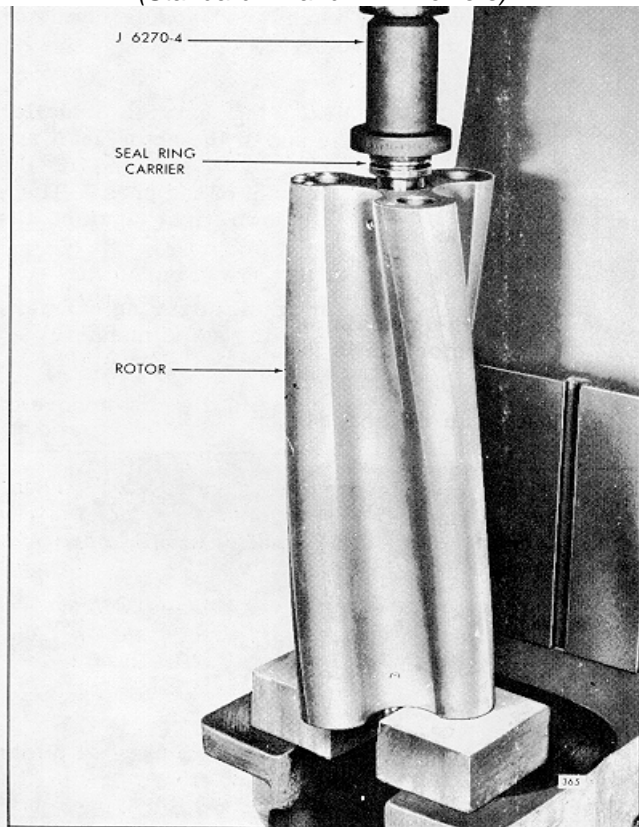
Installing Oil Seal Ring Carrier on Blower Rotor Shaft
